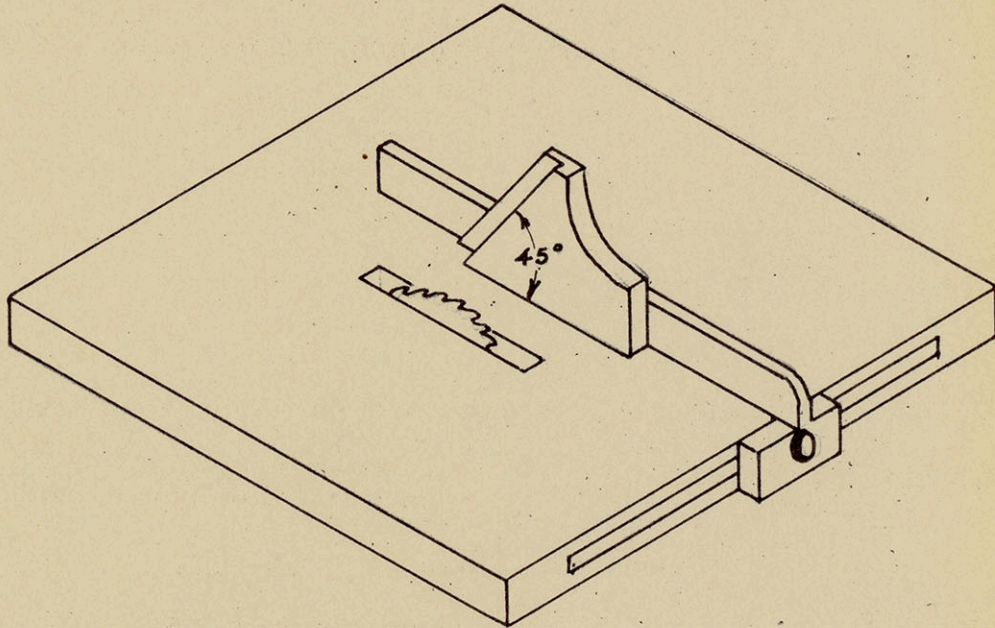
, Jig Used in Cutting Spline Joints on Circle Saw
